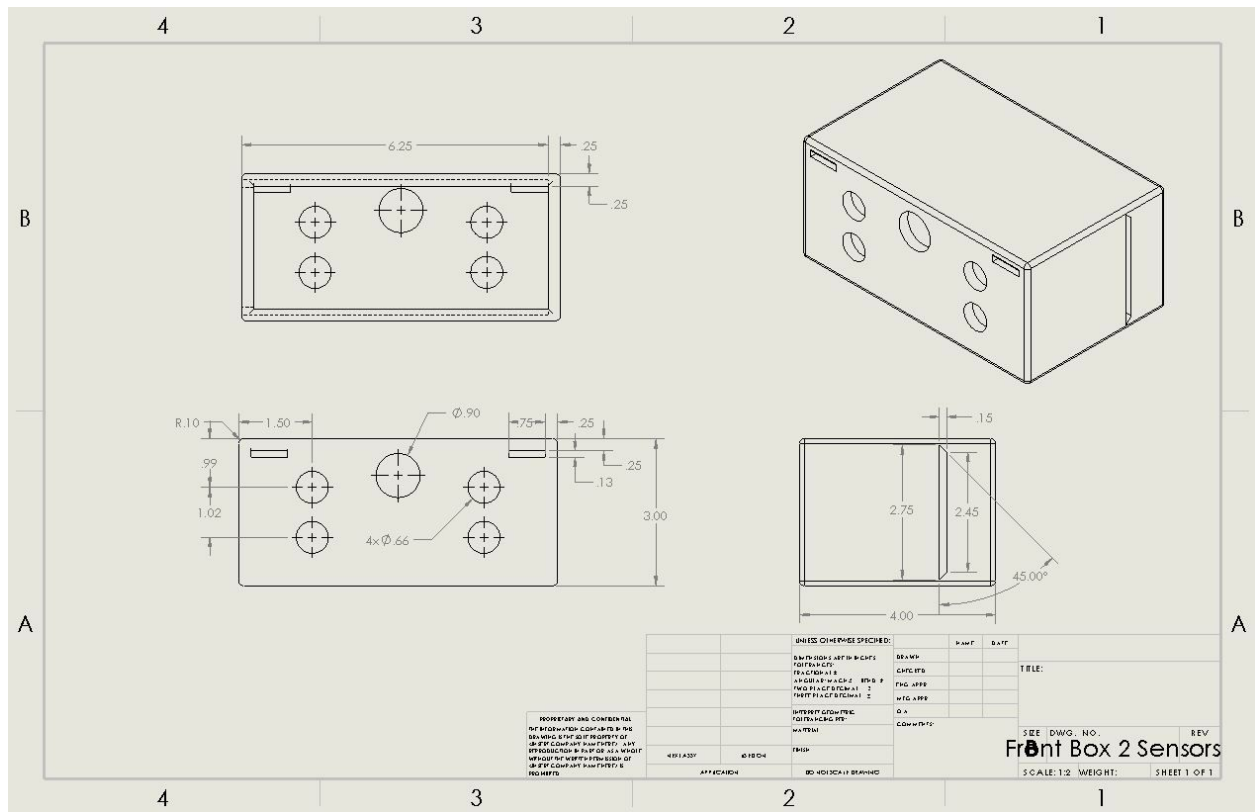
Detailed drawings of the front sensor housing for the final prototype.
